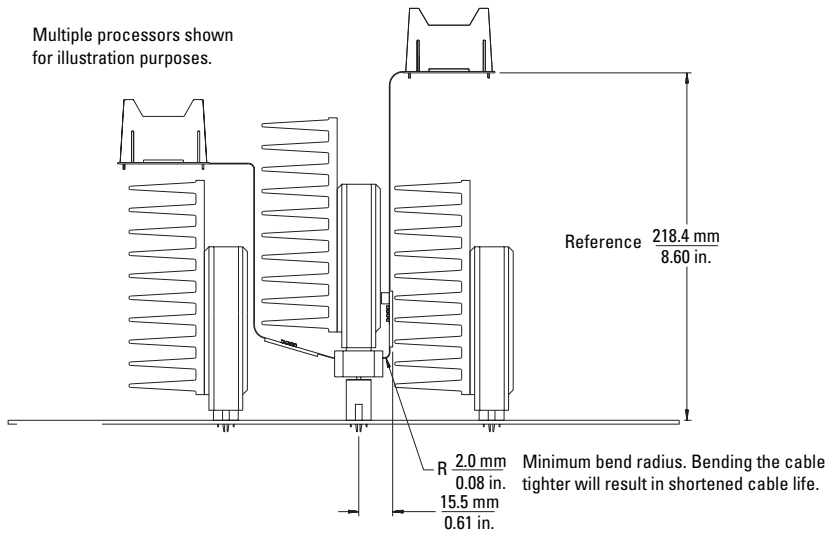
Installed View of E2492C SC 330 (Slot 2) Probe Adapter
